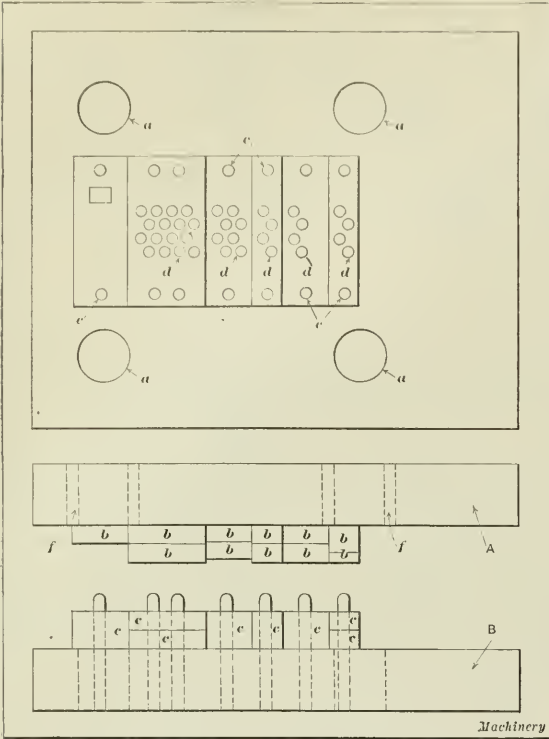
Diagrammatic View illustrating Method of constructing Socket Die
